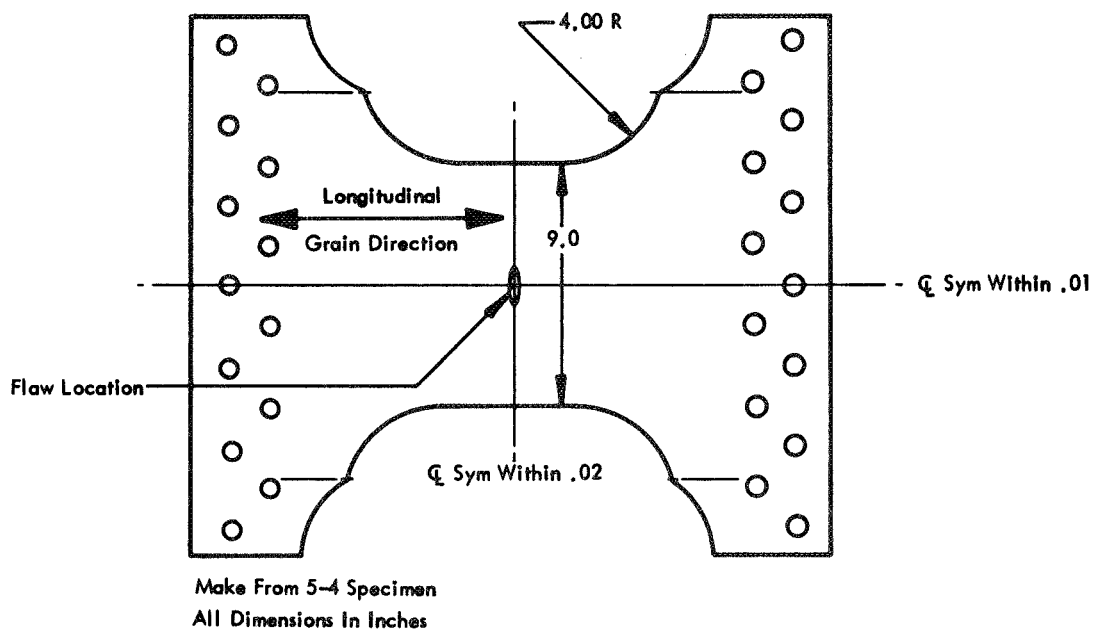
SURFACE FLAW SPECIMEN FOR 2219-T87 ALUMINUM
